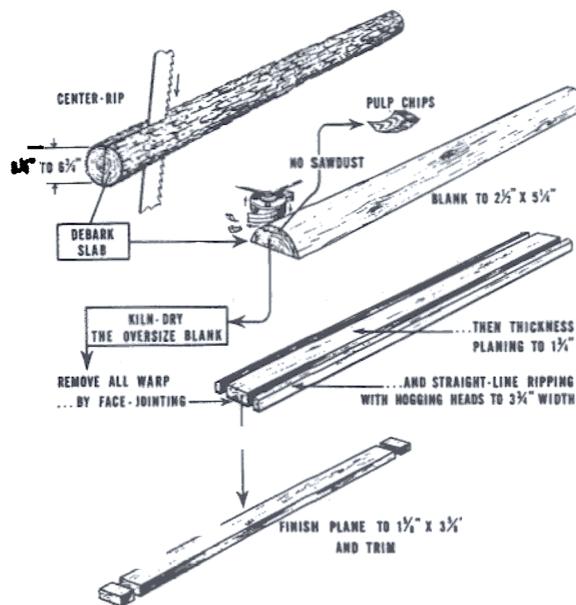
Studs can be made from 8-foot bolts by center-ripping the bolts, debarking the half-bolts, blanking out a stud from each half-core on a chipping surfacer-edger, kiln-drying the oversize blanks, and then machining the blanks to warp-free size.
